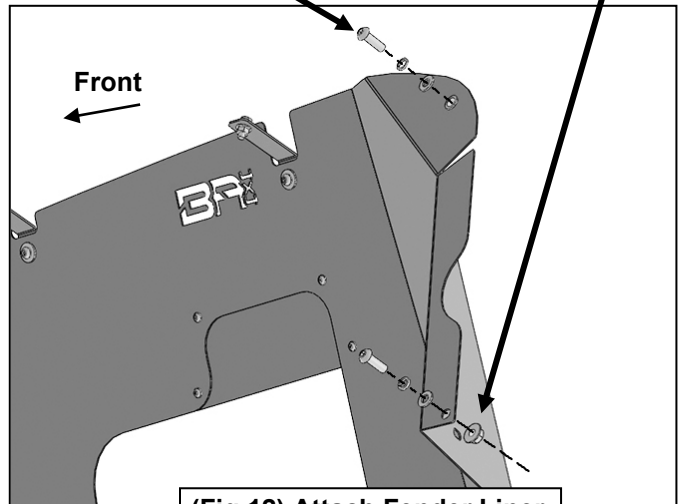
Attach front of Fender Liner to Front Lower U-Bracket
